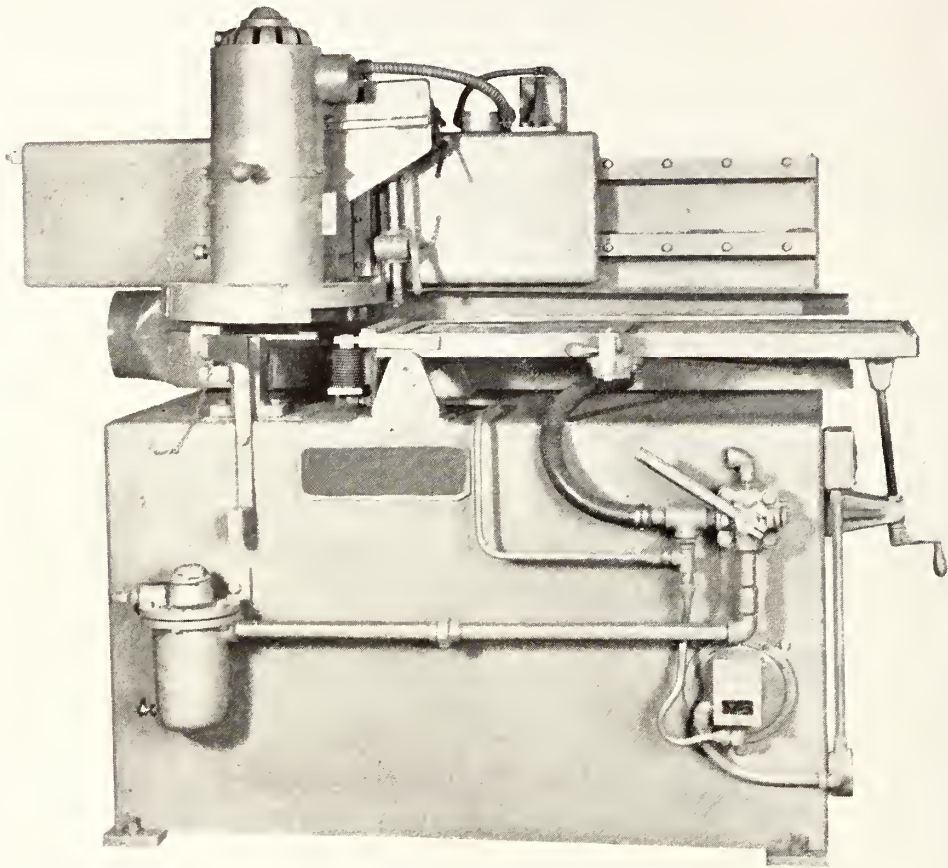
Vertical cutter-head scarfing machine.
